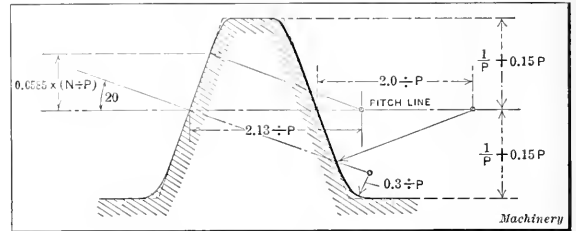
Hob Tooth for generating a 20-degree Involute Milled Tooth
